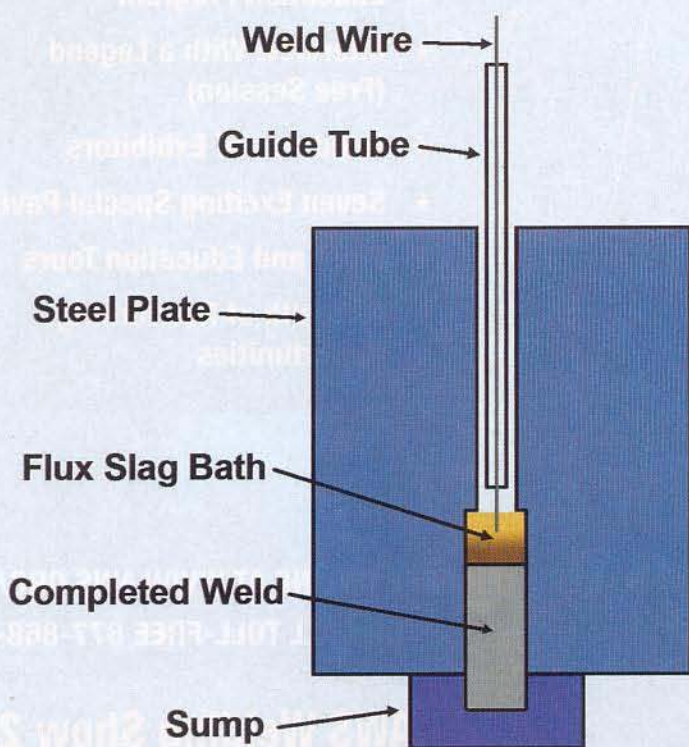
Narrow groove improved electroslag welding for joining thick steel plates.
